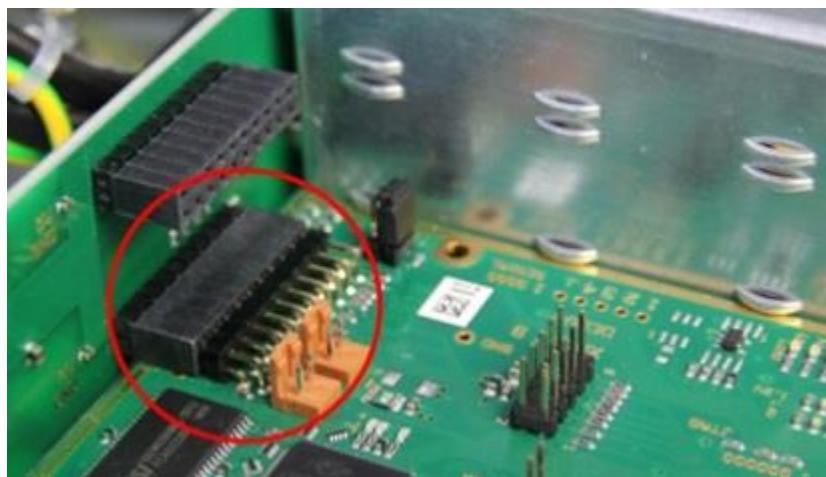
Main Card in Horizontal Guidance, Snapped in, 2-Card or 6-Card Chassis Backplane
